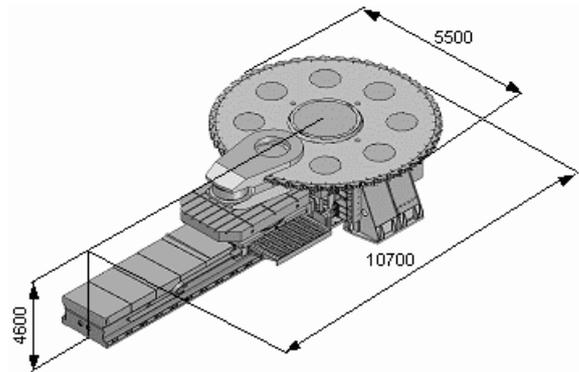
Milling machine used for cranking FS-550 CNC CAD model with marked overall dimensions [8]
